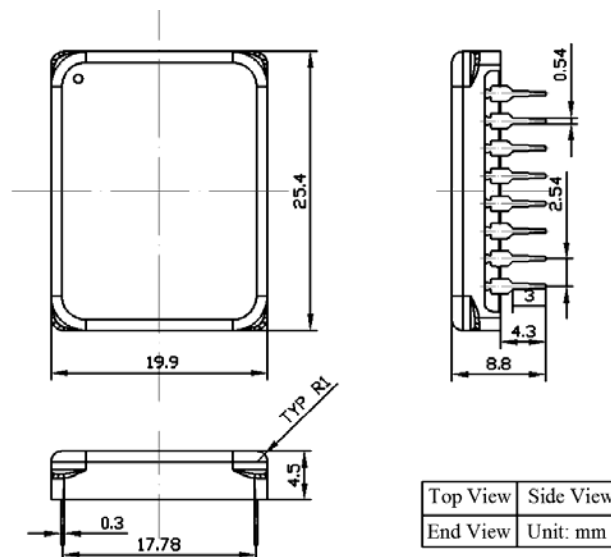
Dimensions of the DIP package controller of TEC5V6A-NT
